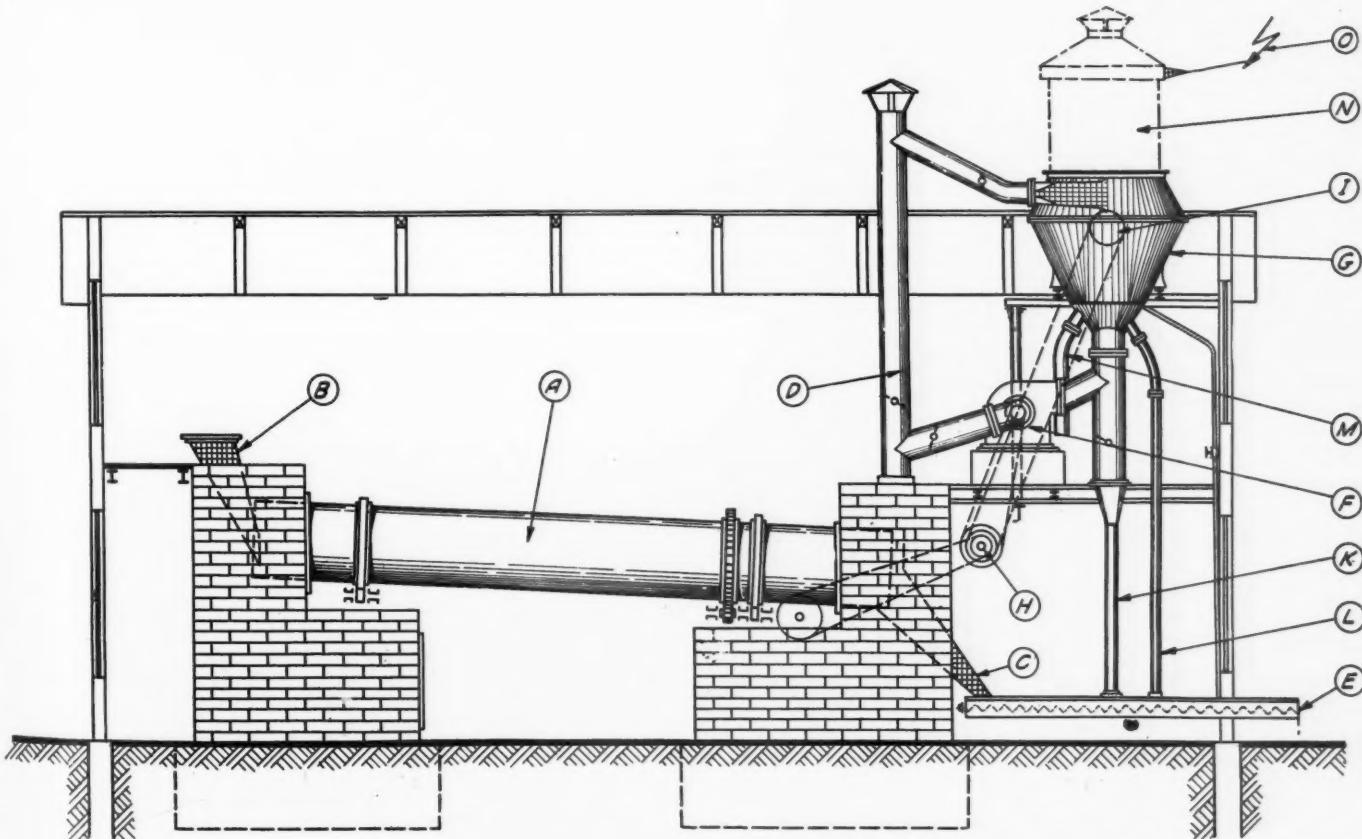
Design of rotary kilns equipped with Stelz process of dust collecting. Key to diagram: (a) rotary kiln; (b) conveyor feeding the raw mix to the kiln; (c) clinker conveyor from kiln or from cooler; (d) exhaust for dust; (e) cement conveyor; (f) exhaust fan; (g) Stelz separator-sifter; (h) motor; (i) filter-fan; (k) product of the separator, No. 1, coarse; (l) product of the separator, No. 2, fine; (m) product of the separator, No. 3, finest dust which is incorporated in the cement; (n) electrified chamber for dust precipitation; (o) special dust-collector with electric coils for exceedingly fine absorption of dust
